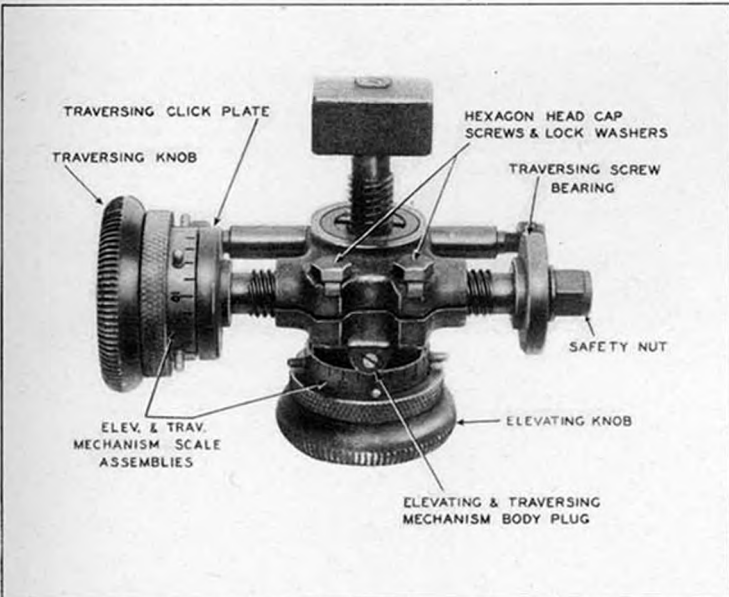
Elevating and traversing mechanism group, assembled, front view.
